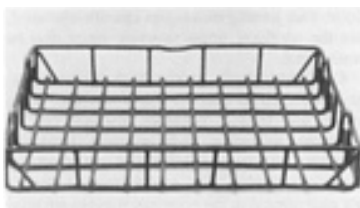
GAS-TUNGSTEN ARC WELDED MA 956 HEAT TREAT BASKET. INCONEL 617 FILLER METAL WAS USED.
